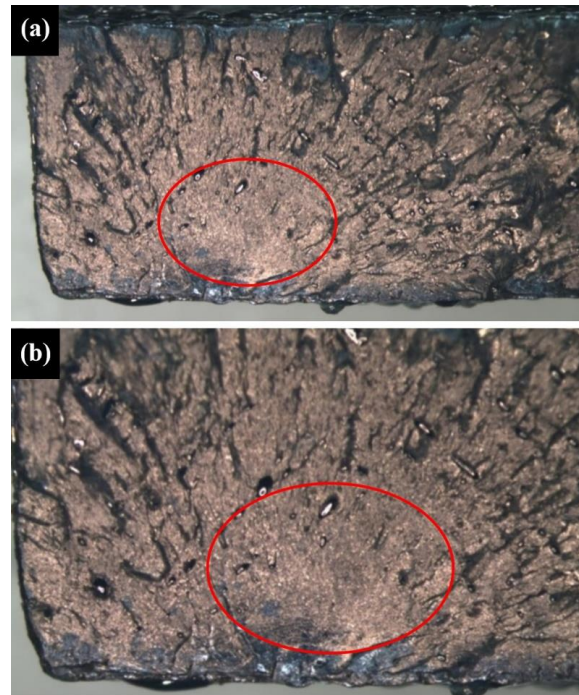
The fracture surface of the upright orientation (light microscopy): (a) general view; and (b) close-up showing the crack origin
